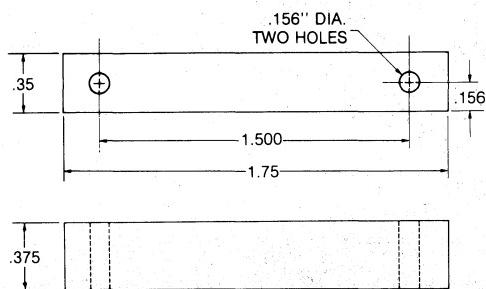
Adapter for Low Profile Package to Standard Hybrid Amplifier Test Fixtures
